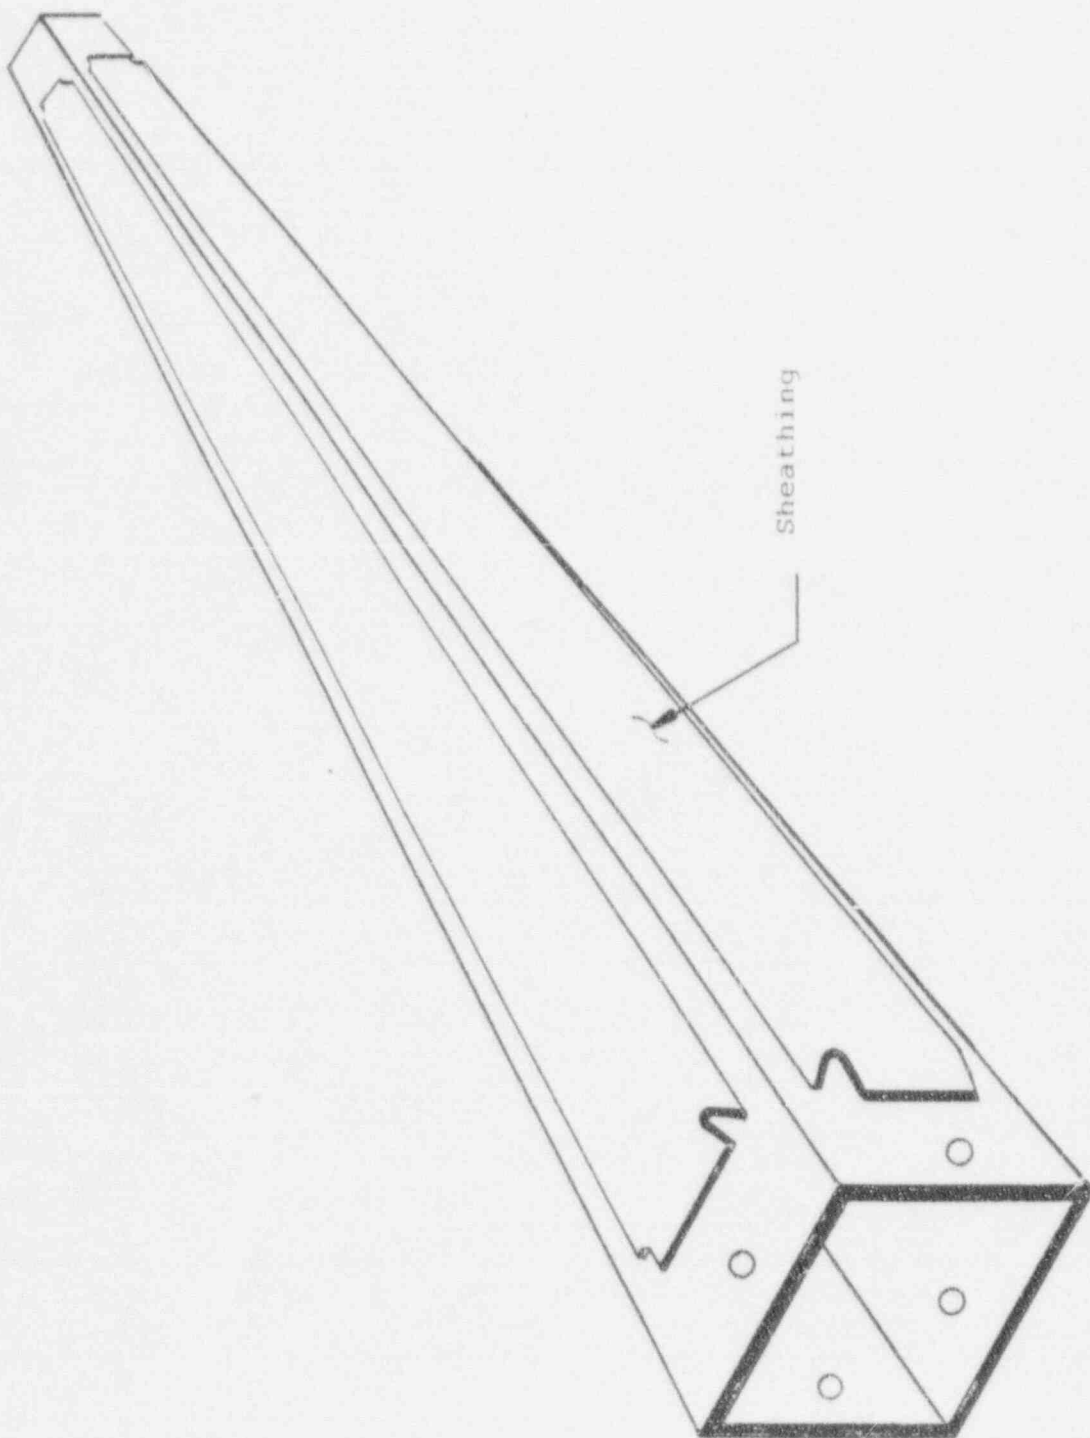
COMPOSITE BOX ASSEMBLY
